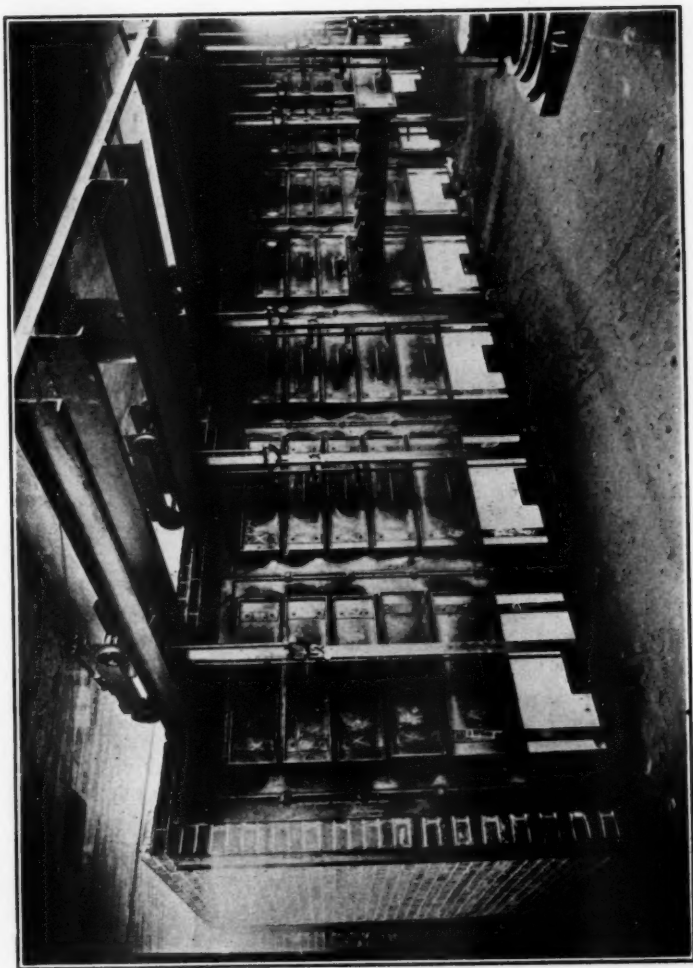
DRAWER TYPE OF OVENS WITH DRAWER PULLED OUT.
